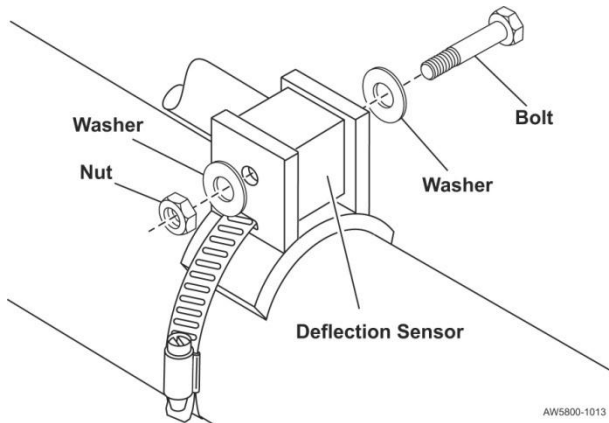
Inserting Bolt and Washers into Sensor and Bracket
